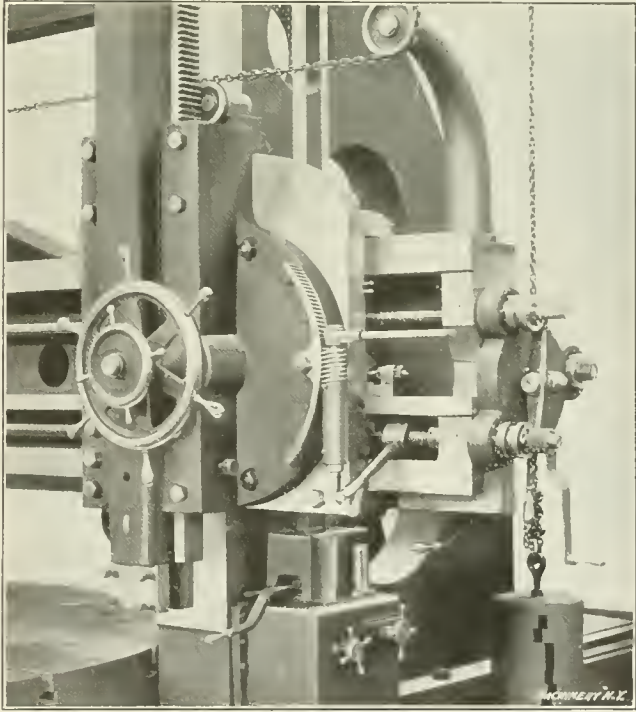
Detail View showing Head and Controlling Levers for Feed and Rapid Traverse
